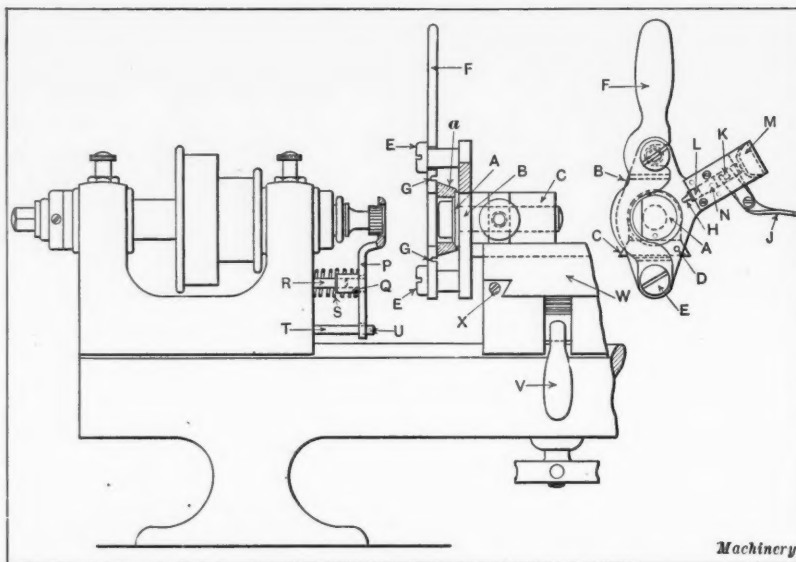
Bench Lathe with Boring Cross-slide equipped for under-cutting Fuse Parts
